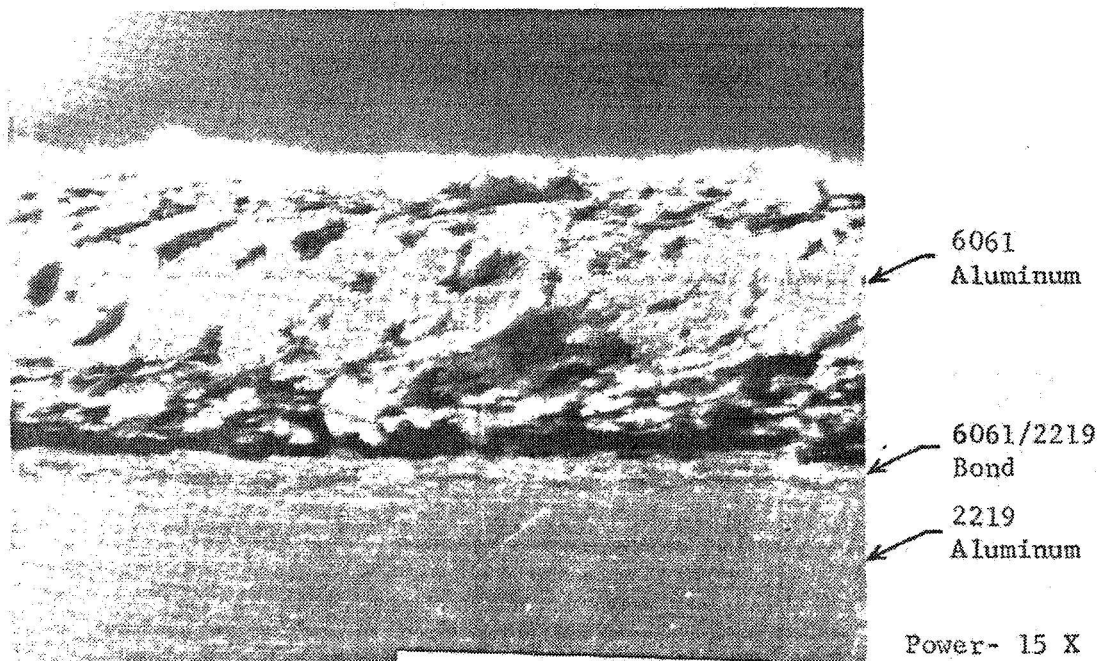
Inertia Welded Joint After Corrosion and Burst
